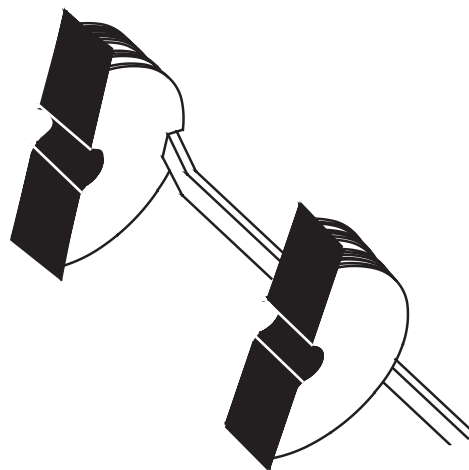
LOCK-TAPE STRIP APPLIED TO END PLATE HALF
